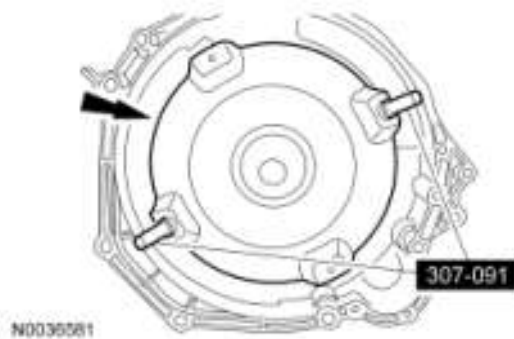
Removing Torque Converter Using Special Tool (307-091)
